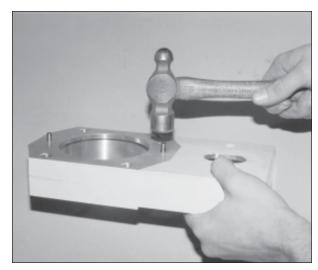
Reinstall gear box alignment pins if necessary.
